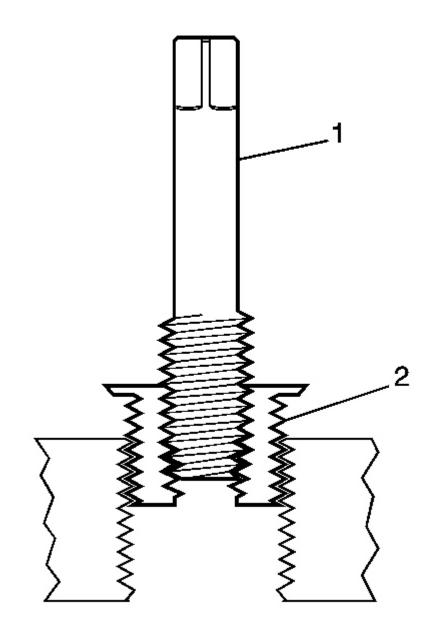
Installing Insert - Tapered Thread Courtesy of GENERAL MOTORS CORP.
